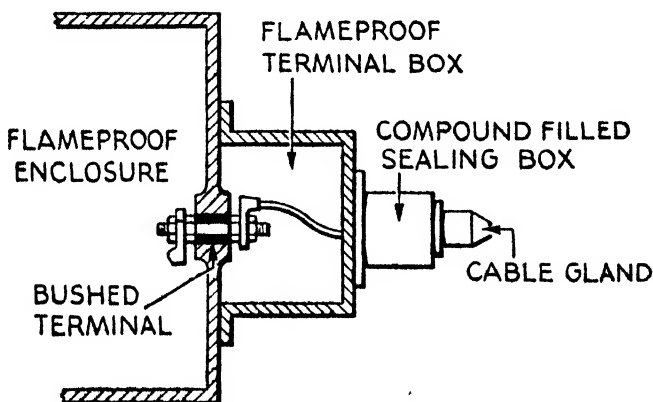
ARRANGEMENT OF BUSHED TERMINALS FOR CONNECTING SUPPLY TO FLAME-PROOF GEAR
